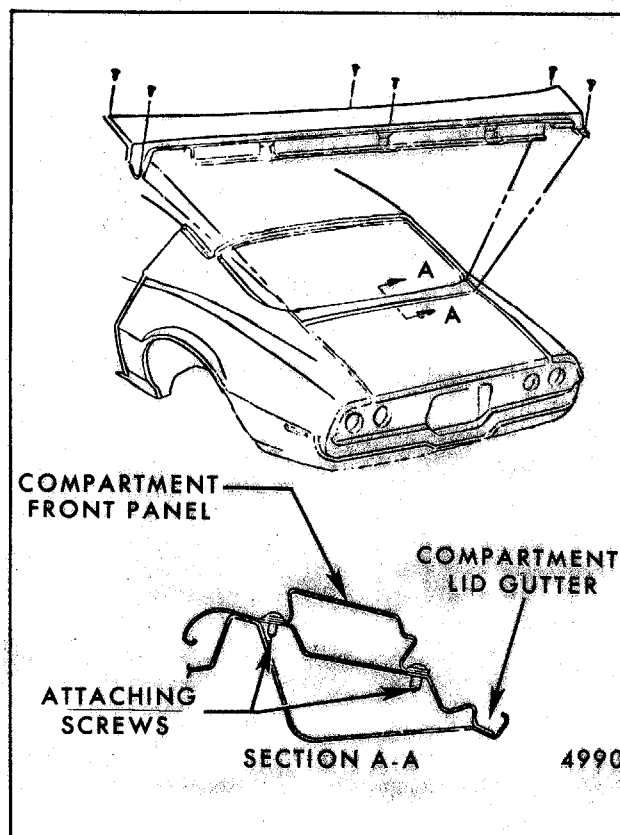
Rear Compartment Front Panel - "F" Styles
